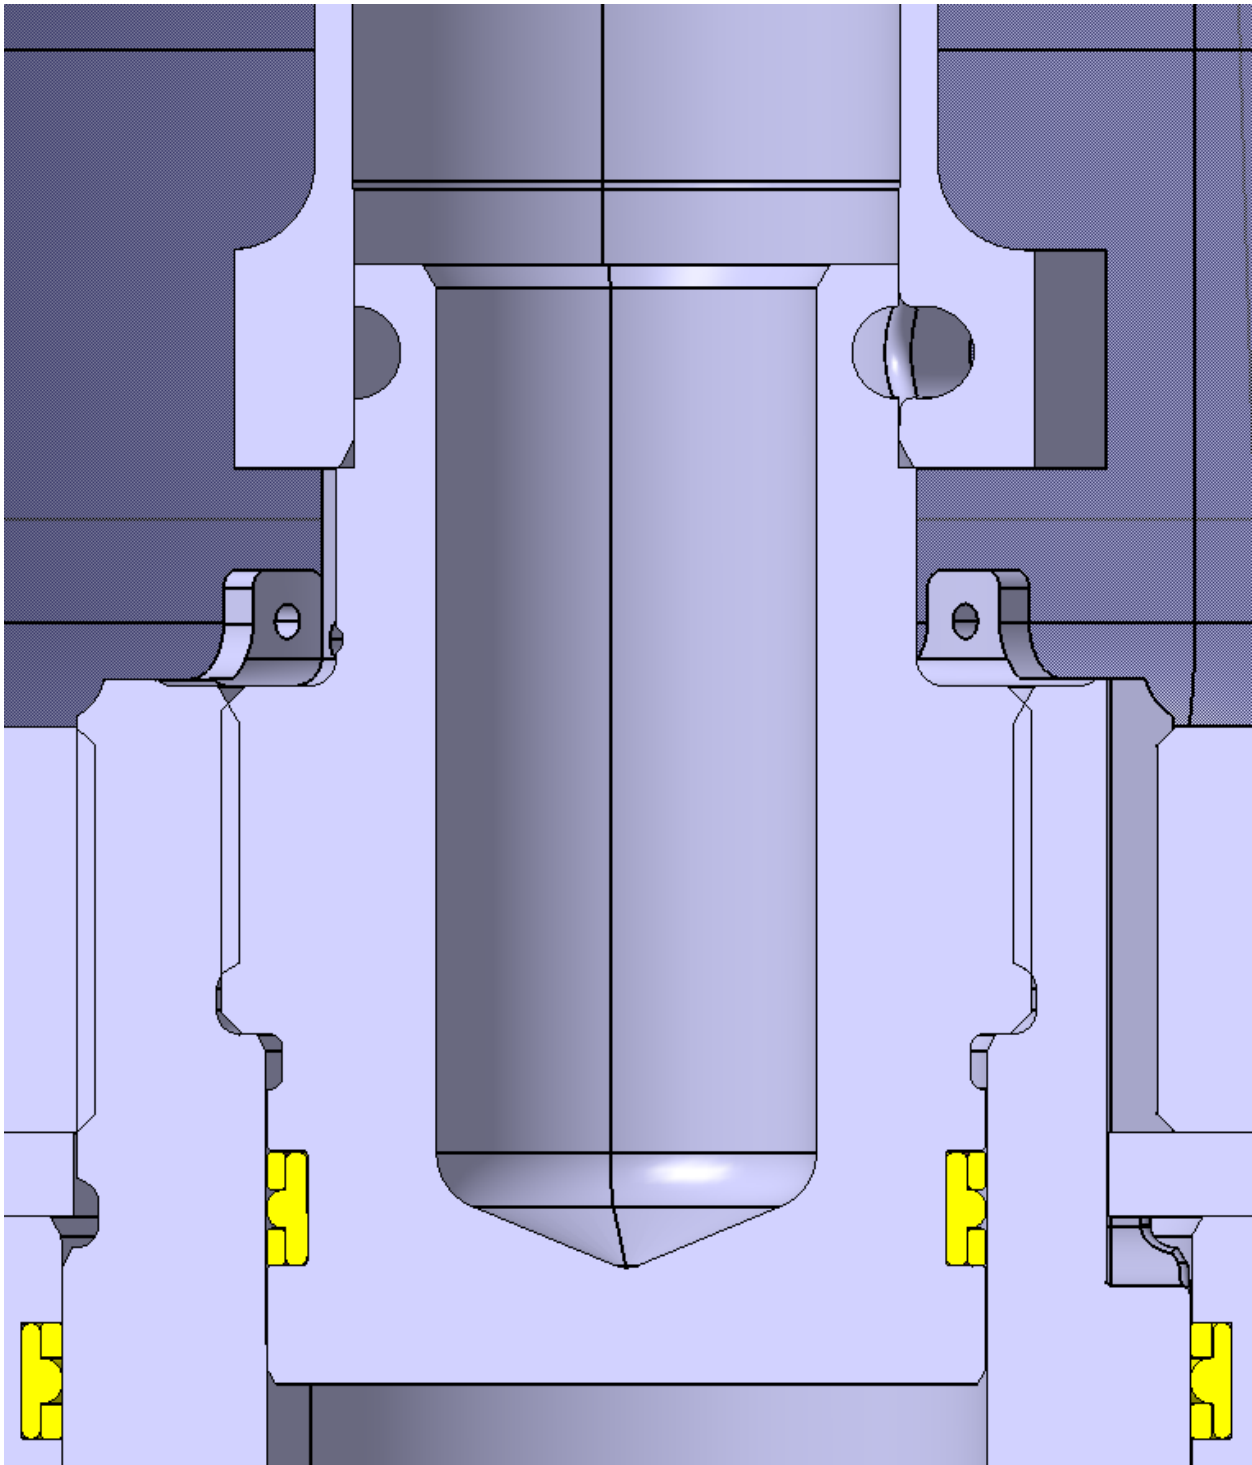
Section View of New OST Plug and New Support Tube Interface (Final Design)
